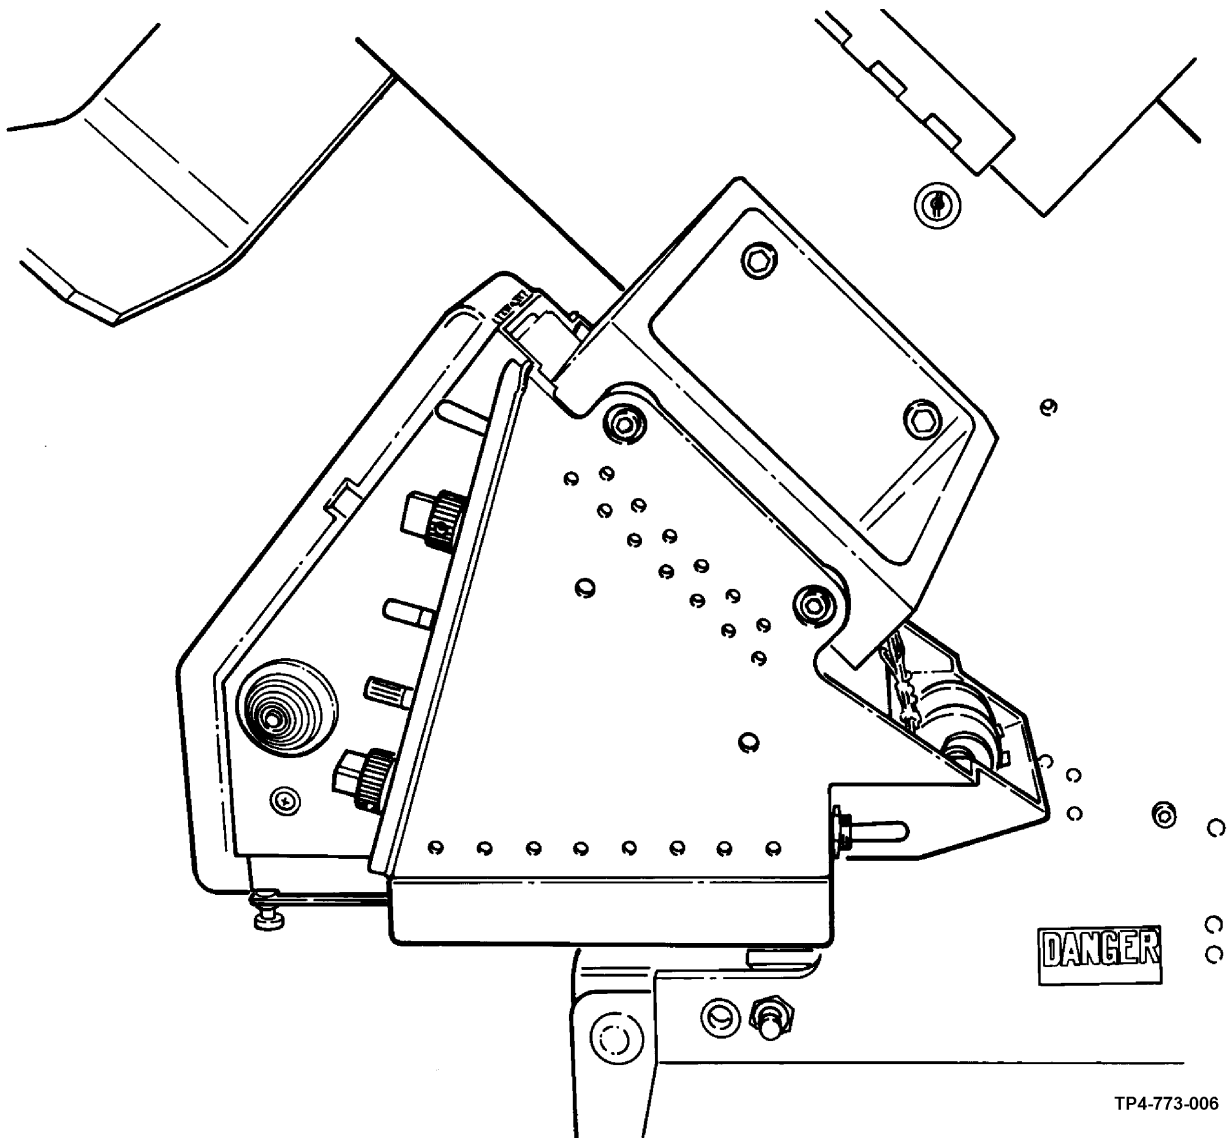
Control Panel Assembly Installed in Control Panel Test Position (Left Mounting Holes)
